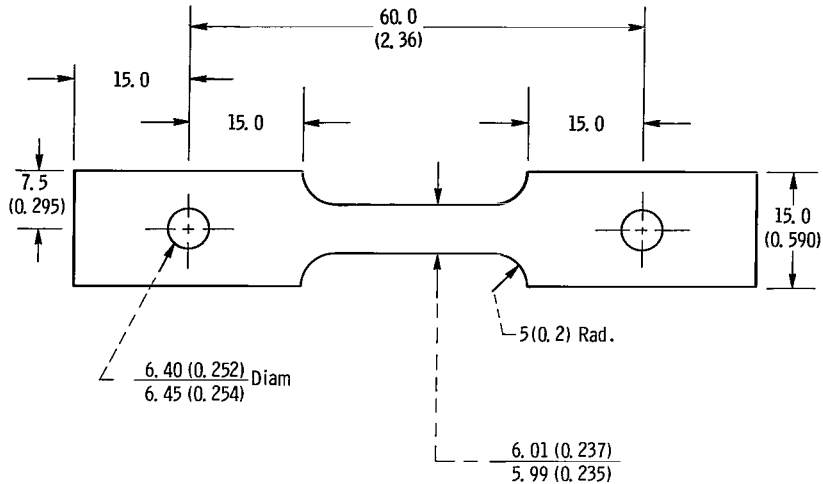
Dimensional specifications for tensile specimens. Specimen thickness, 0.40 millimeter (0.016 in.).
